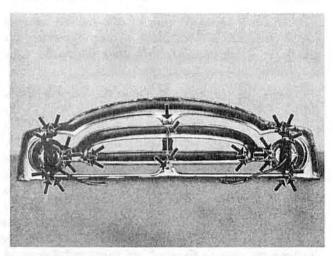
Rear View of the Complete Grille Assembly Showing Assembly Screws
